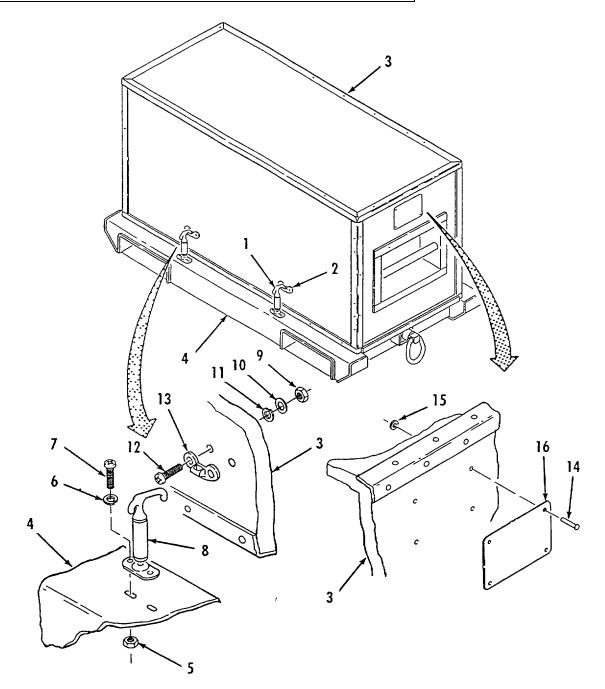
Cover Assembly (Pressure Reducing) Repair (Sheet 1 of 2).
